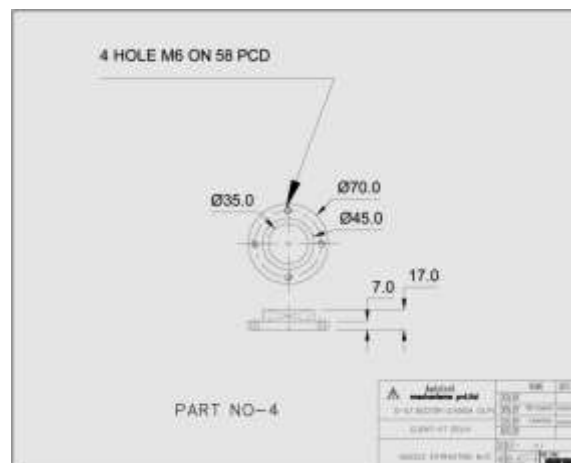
Vertical threaded bar stand base bolt dimensions
